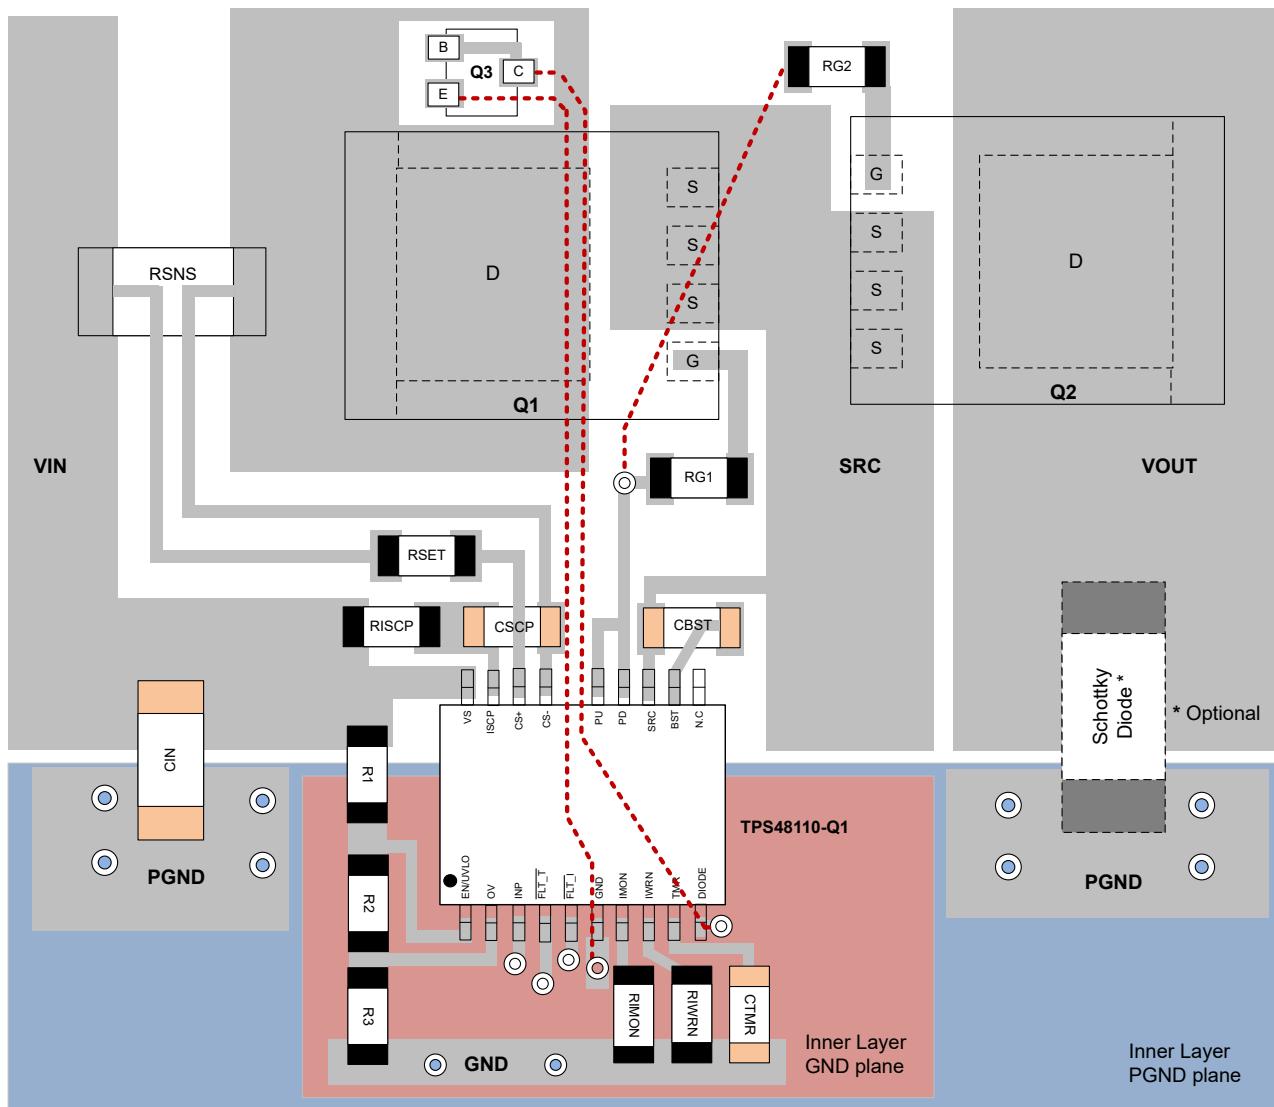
Typical PCB Layout Example With TPS48110-Q1 With B2B MOSFETs
